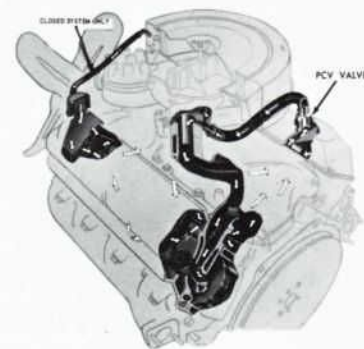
PCV Valve Location—Most 8 Cylinder Engines
